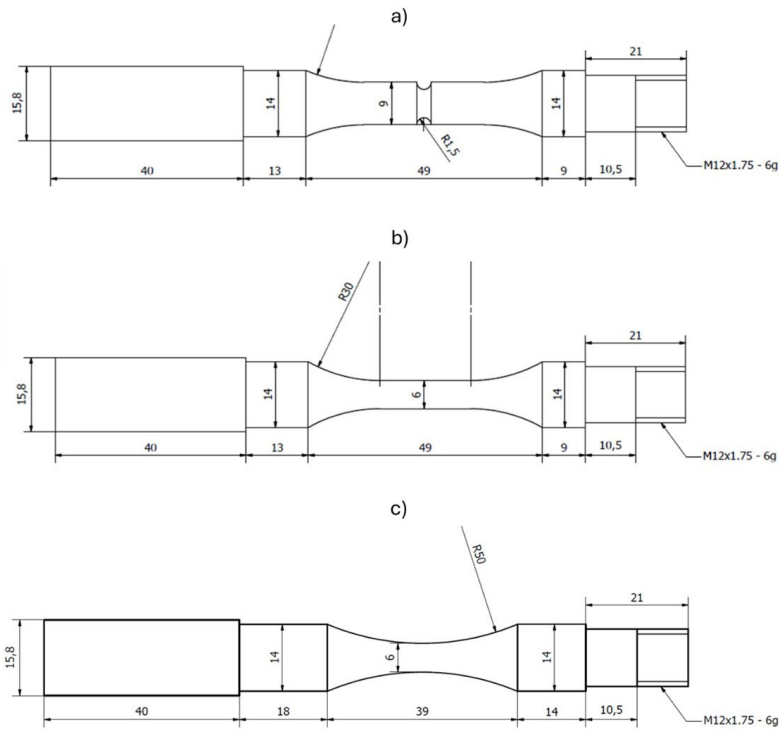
Specimen drawings used for testing, where: a) notched specimen, b) straight-sided (parallel) specimen, c) hourglass-shaped specimen.
